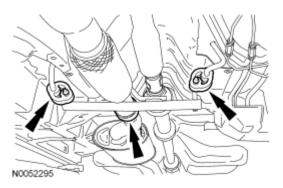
Locating Exhaust Flexible Pipe Clamp & Exhaust Hangers Courtesy of FORD MOTOR CO.
